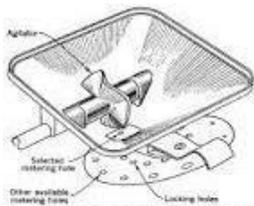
Stationary-opening seed-metering device with agitator, as employed on some vegetable seeders (hopper not shown).
